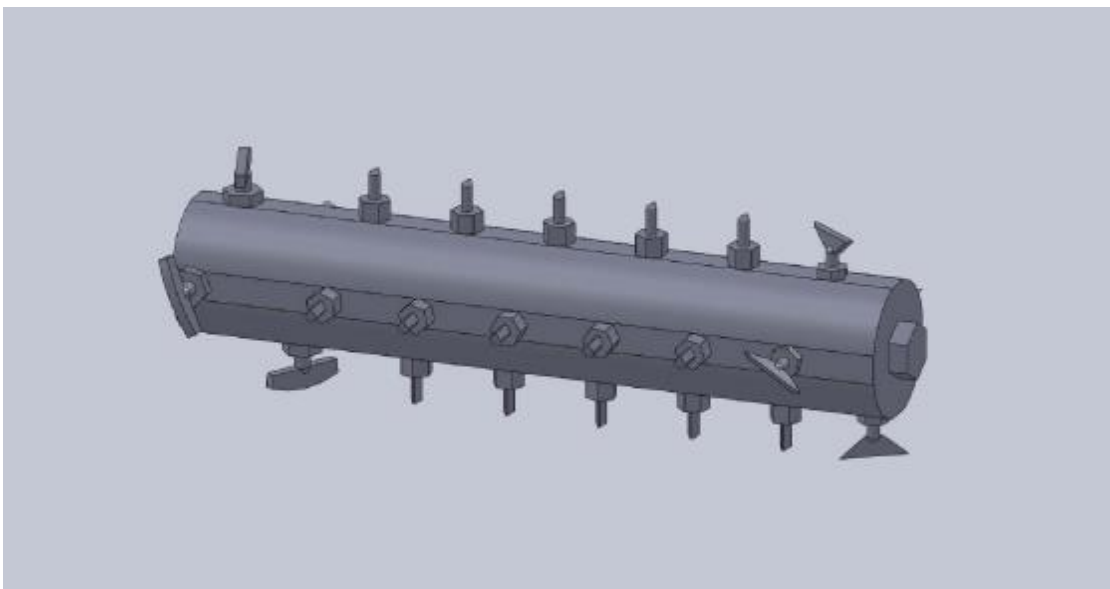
isometric view of the impeller inside the Lódige CoriMix CM5 continuous high shear granulator casing
